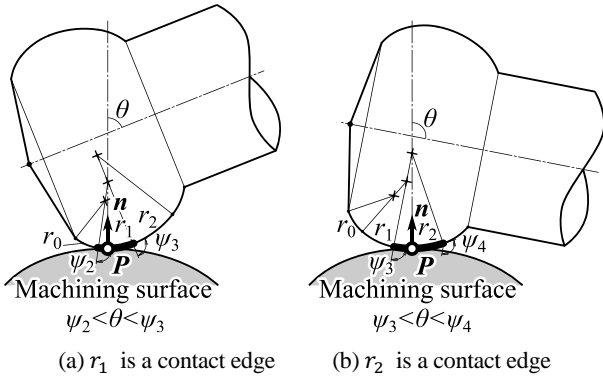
By comparing θ and ψ , it is possible to identify which cutting edge r is in contact with the machining surface.
